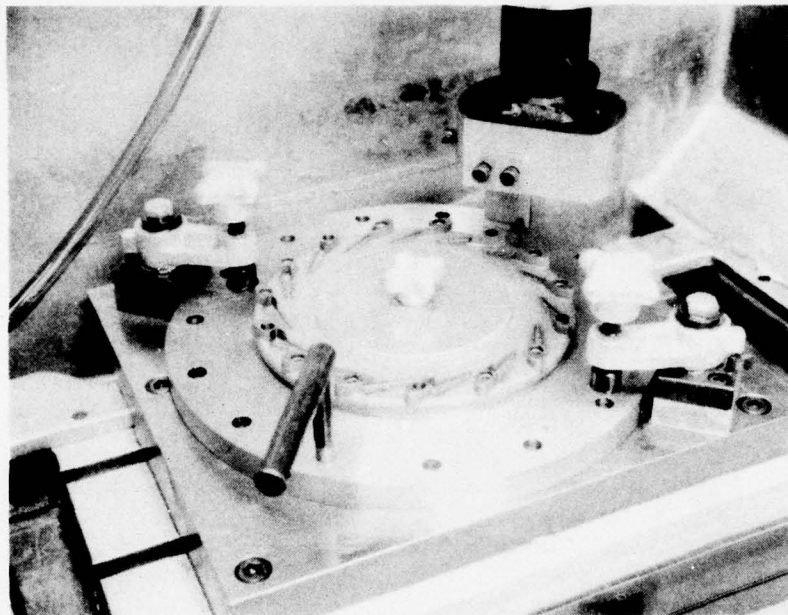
Tooling Set-Up for EDM of Recesses in Nozzle Shrouds
